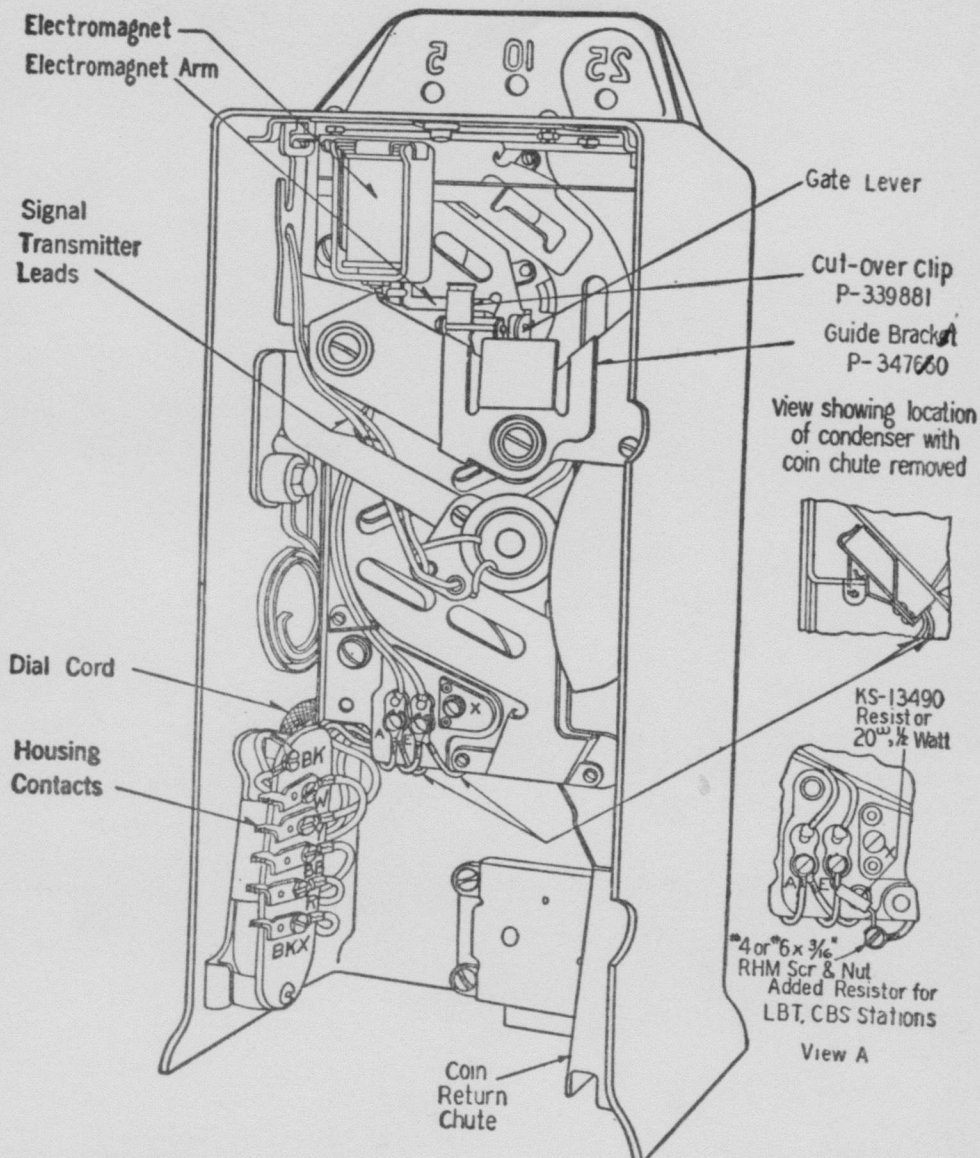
191-Type Coin Collector by Conversion—Upper Housing
